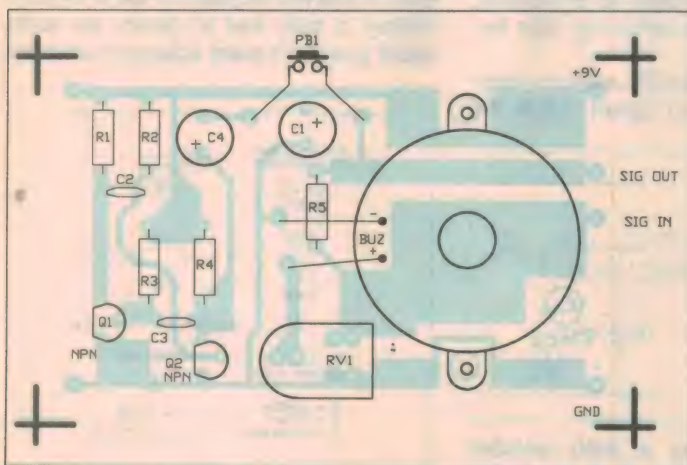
The component layout for the PCB. Check that your particular transducer has enough mounting space before soldering the other components.
